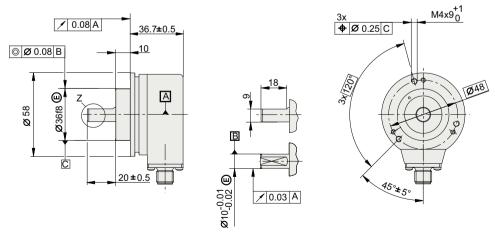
Dimension drawing of clamping flange, all data in mm
